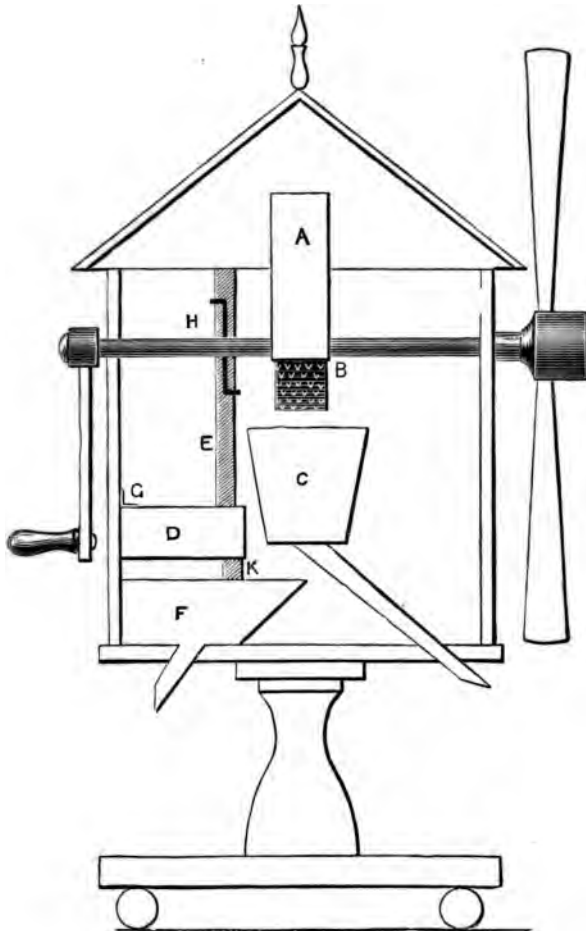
SECTIONAL VIEW OF INTERIOR OF MILL.
